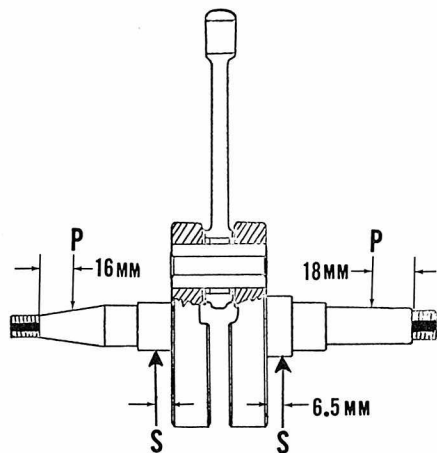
Crankshaft eccentricity is measured at points (P). Crankshaft should be supported at points (S).
